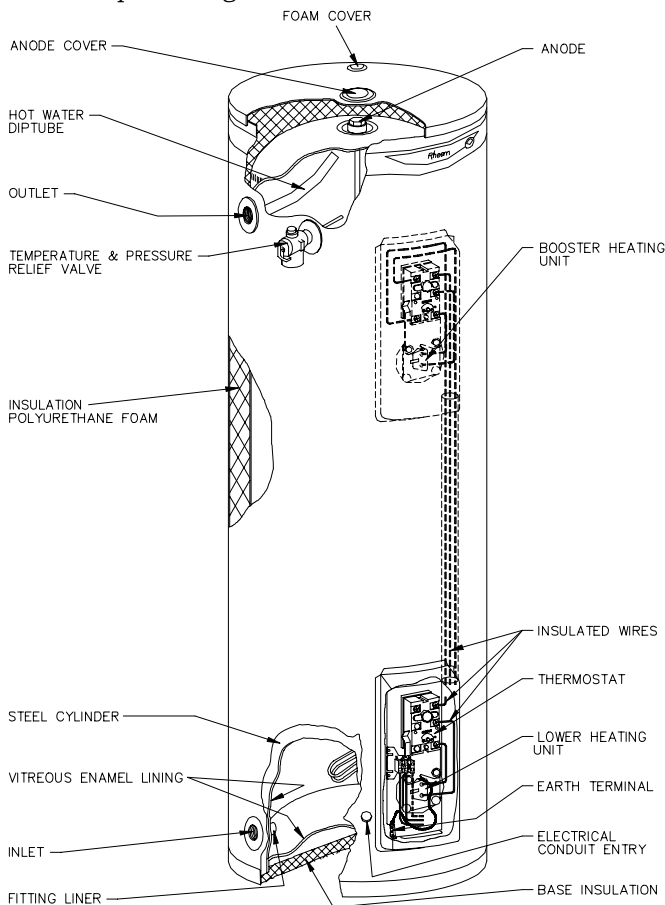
Cutaway view of Rheem electric storage water heater
